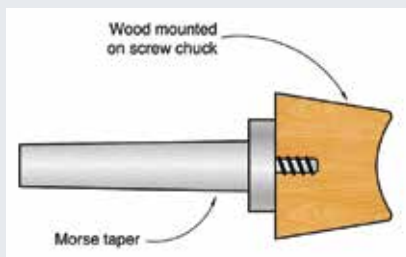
Use an arbor screw chuck for making the drive cup center, which will be mounted in the headstock.
